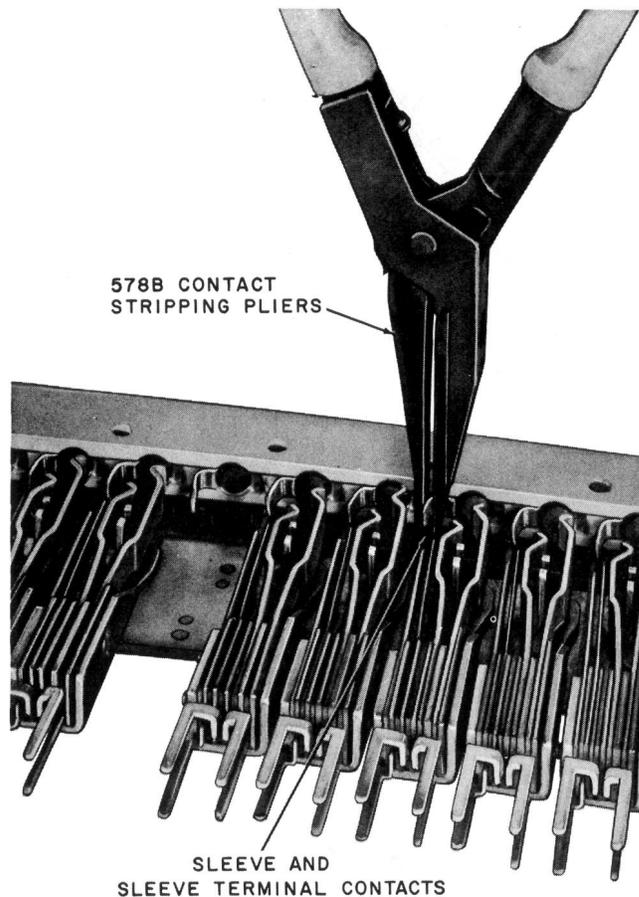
Method of Shearing Contacts of Sleeve and Sleeve Terminal on 510-, 511-, and 512-Type Jacks Using 578B Contact Stripping Pliers
